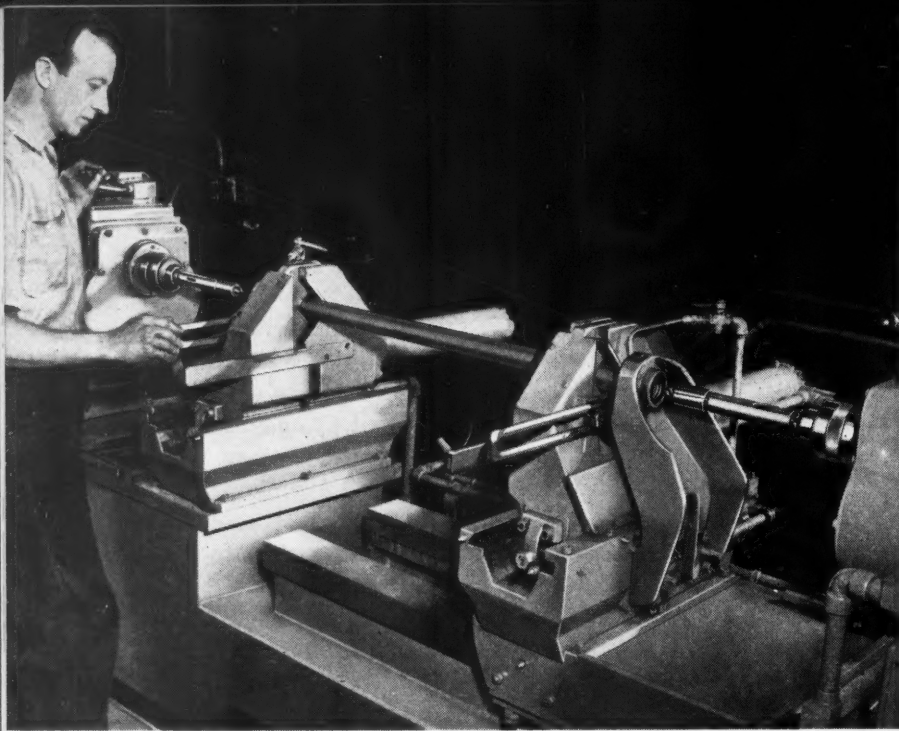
Two-way drilling and tapping machine employed to drill, tap, and then countersink both ends of a shaft simultaneously
